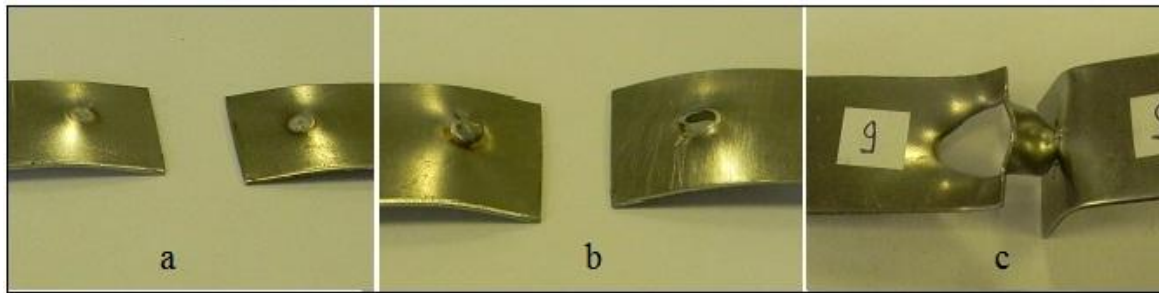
Types failure of spot welding: (a) separation; (b) knotting; (c) tearing.
